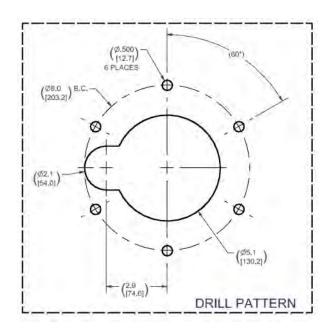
Internal Mounting Kit Roof Cutout Dimensions
